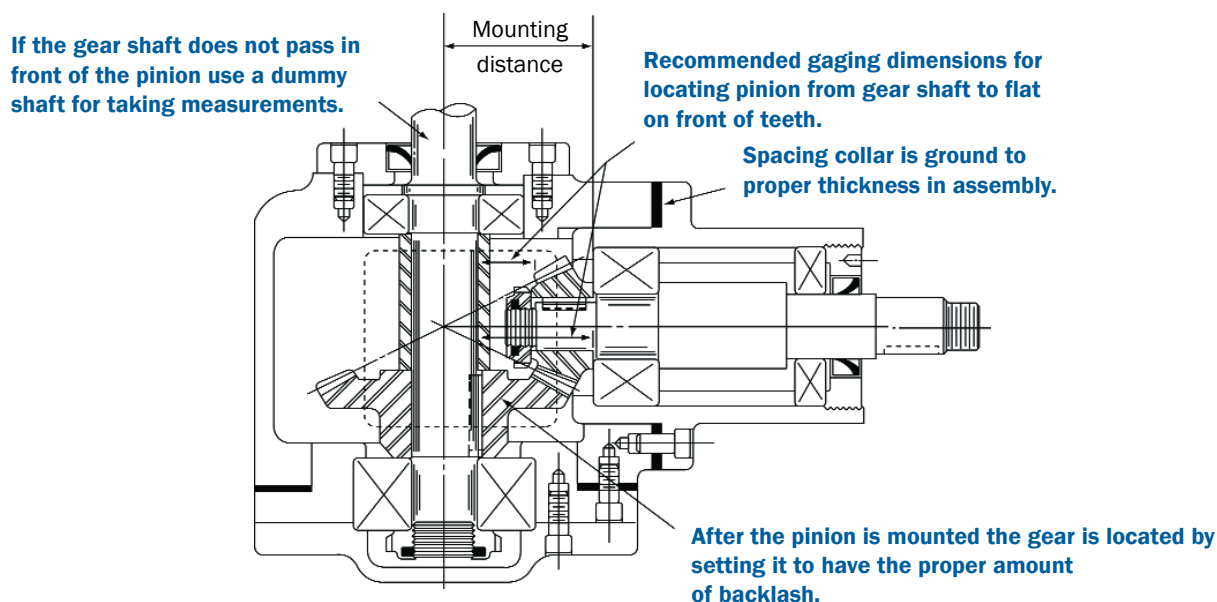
Measuring or gaging as shown is the recommended method for locating the pinion. Pinion should be set to mounting distance marked on pinion, and gear should be adjusted to give correct backlash.
